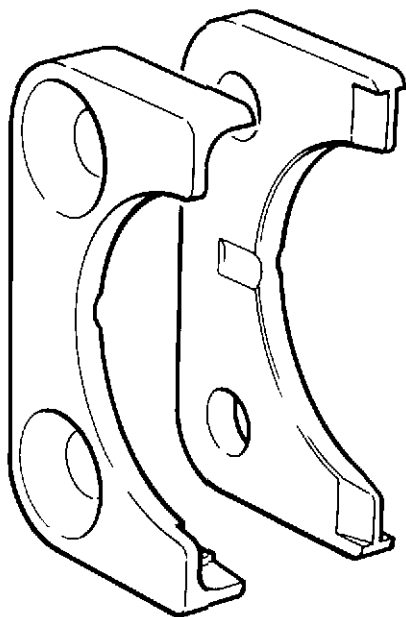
Thrust plate assembly Fig. 14 Cam bore plug ('B' bank)
